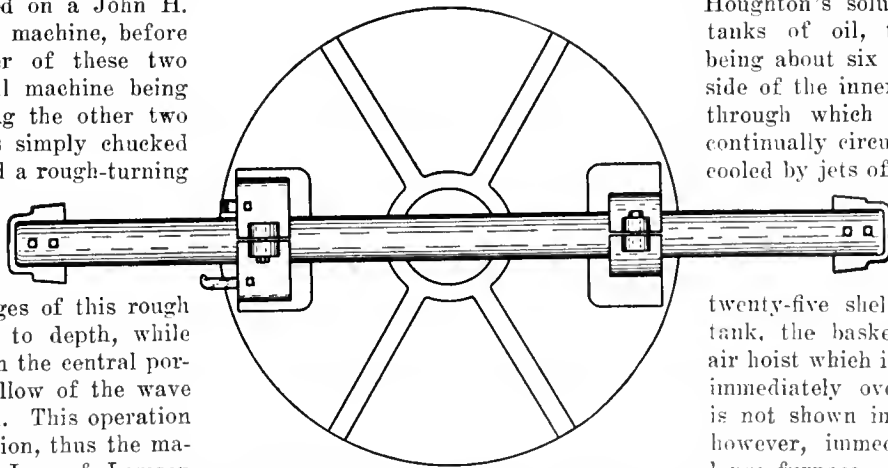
SIMPLE TOOLING ON A "JONES & LAMSON" TURRET LATHE FOR BORING.
